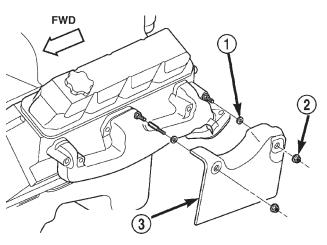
Exhaust Manifold Heat Shield—Right Side
